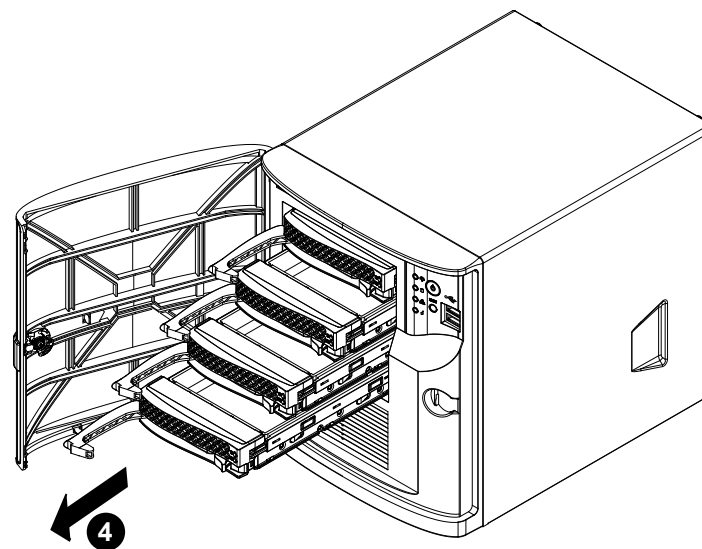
Removing the Hard Drive Carrier from the Hard Drive Chassis
